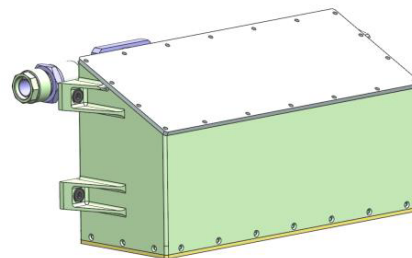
Design of the inlet HEPA filter assembly used on MOXIE to reject dust. Credit: JPL
